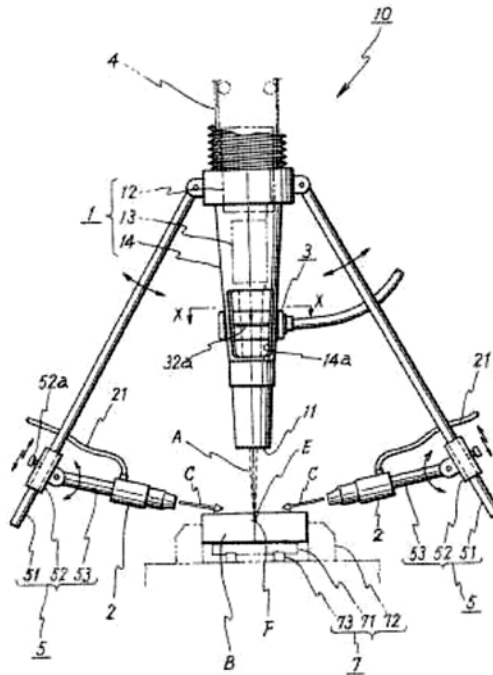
Laser welding apparatus describes of the patent system US 6111214 A
